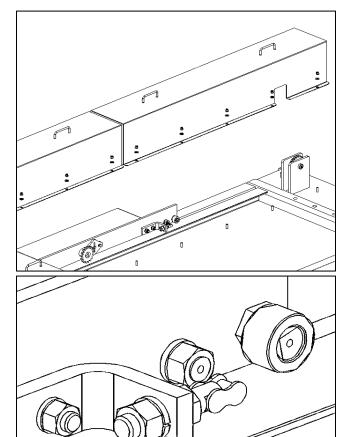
(Left) Chain Guard Removal, (Right) Chain Removal
